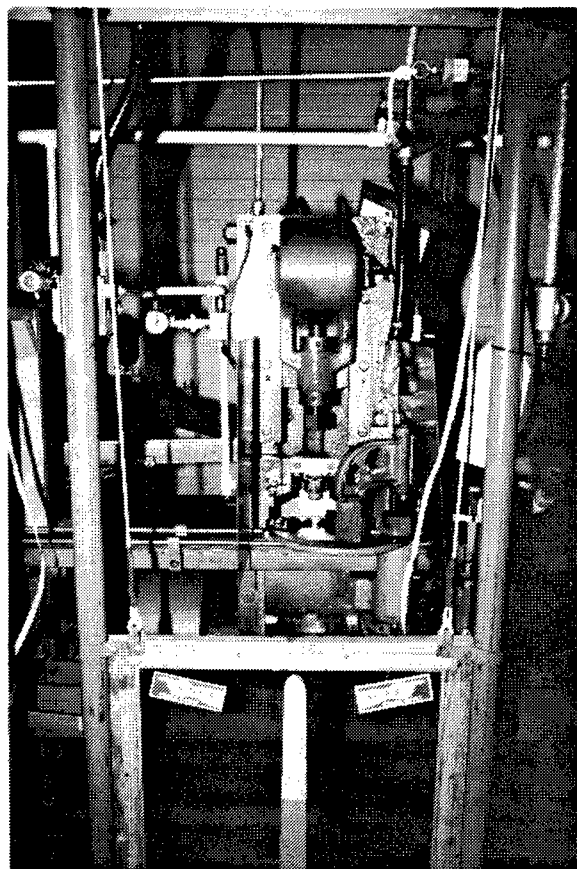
Building 102: Tracer Charge Machine manufactured in 1953 by the L.F. Fales Machine Company.
